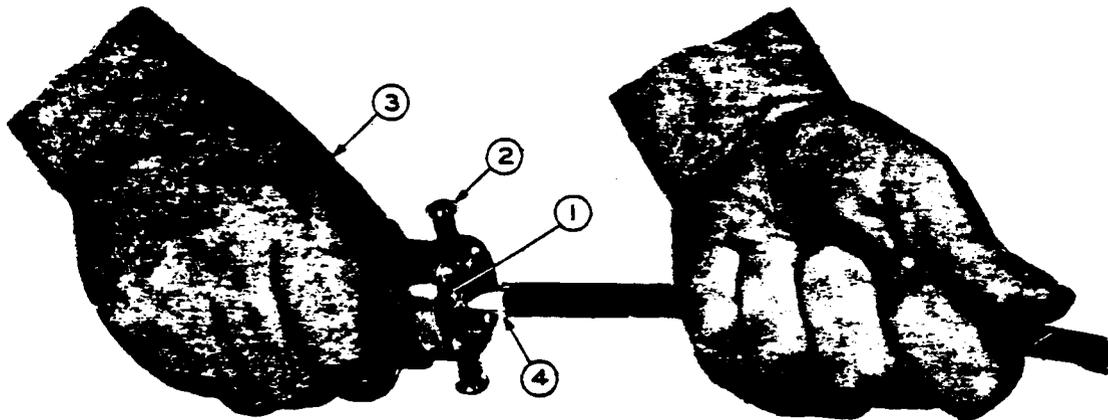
A STOP ASSEMBLY ATTACHED TO R-3186 COAXIAL CABLE STRIPPER (PAR. 4.215)
